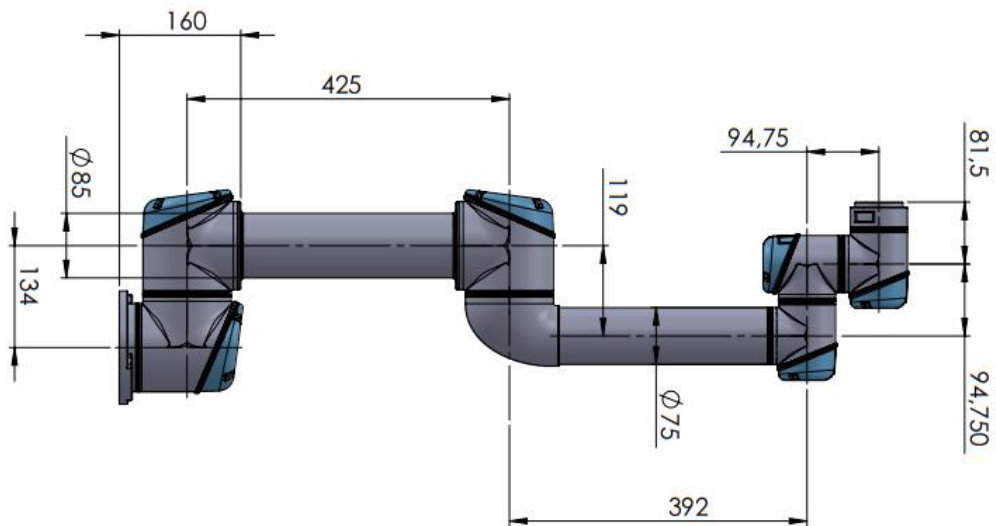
Technical drawing of the UR5 robot arm (all dimensions are in mm) [83]
